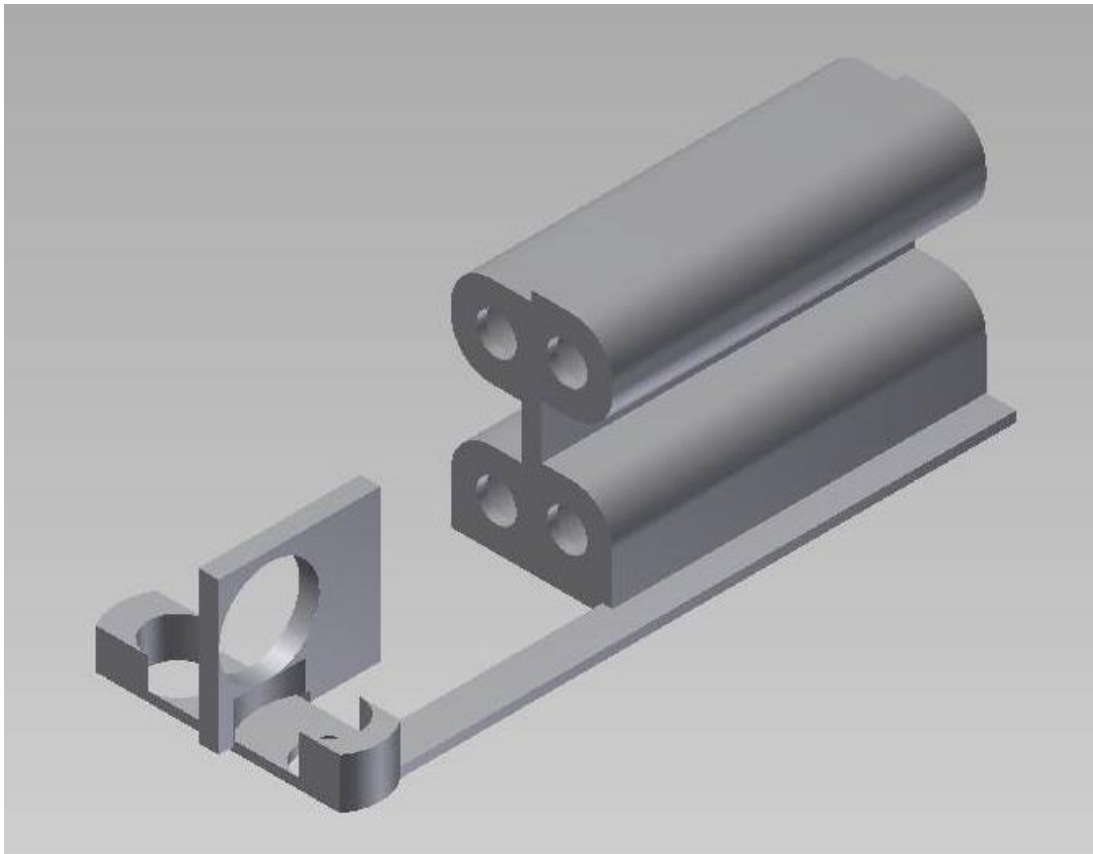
Mk2 front unit frame. The motor cover has apertures in the anterior aspect to allow the passage of the micro motor shaft while anchoring the motor body within the encasement.
